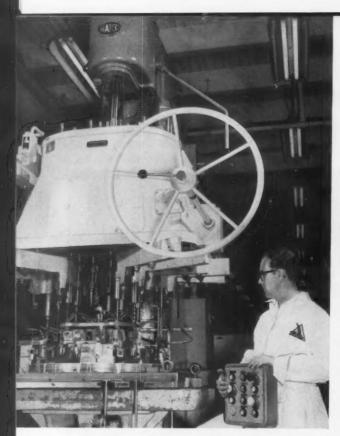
A two-level rotary jig on the table of this multiple-spindle drilling machine facilitates drilling and counterboring twenty-one holes in six sides of a heat-treated steel part.
